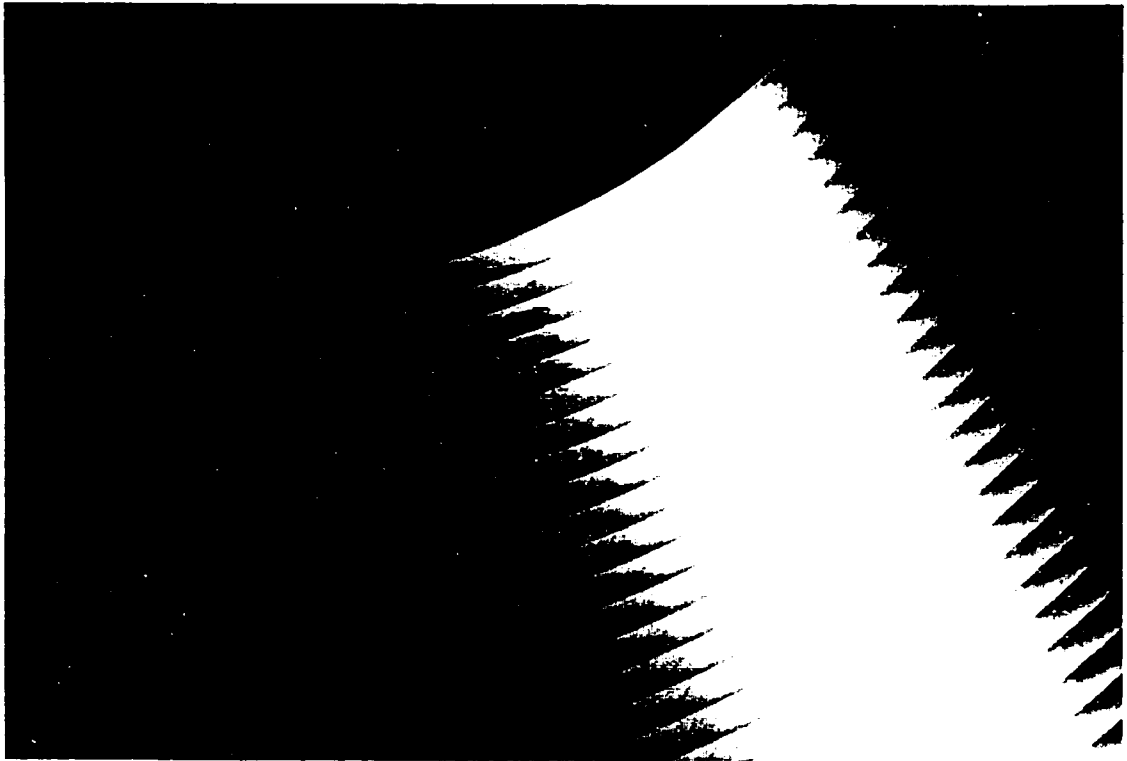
A Test Surface Machined with The Inclined Tool Method, $\alpha = 6^\circ$
